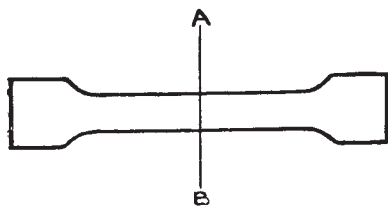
Test piece of wrought iron welded at A B. See Fig. 6 for micro-section.
